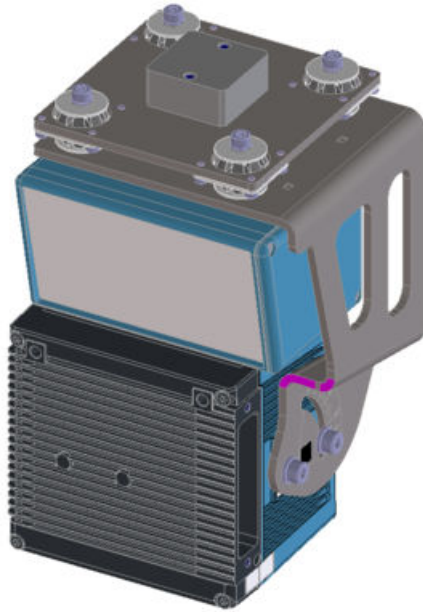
Device with oscillating mirror: Mounting bracket with vibration damper, mounted horizontally
